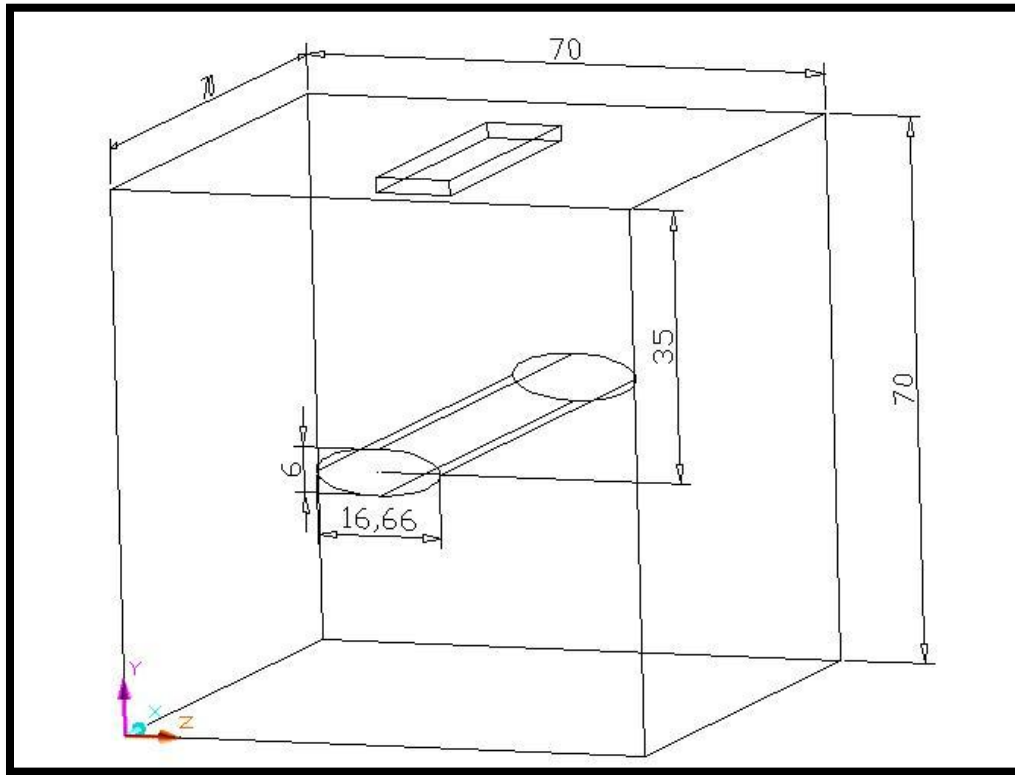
3D view for Dimension of Ellipse Horizontal shape cross-sectional cooling channels
